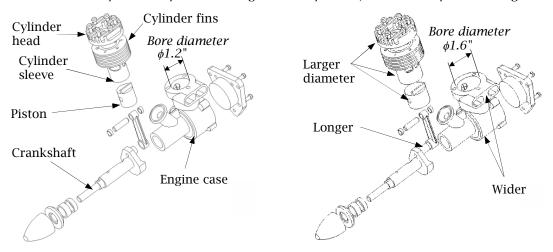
A single-piston engine—exploded view, (a) bore diameter 1.2", and (b) bore diameter 1.6".
